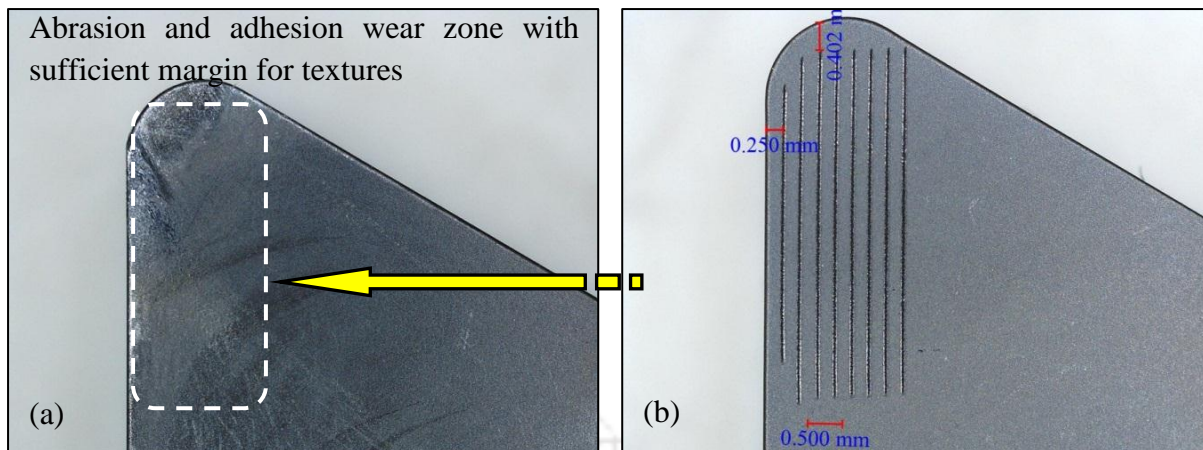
(a) Rake surface region for mechanical micro-texturing and (b) fabricated rake surface mechanical micro-textured cutting tool
